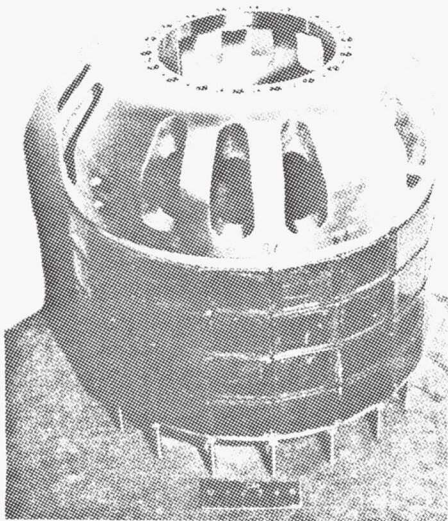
CTPC Alternator Magnet Carrier Before Final Machining
